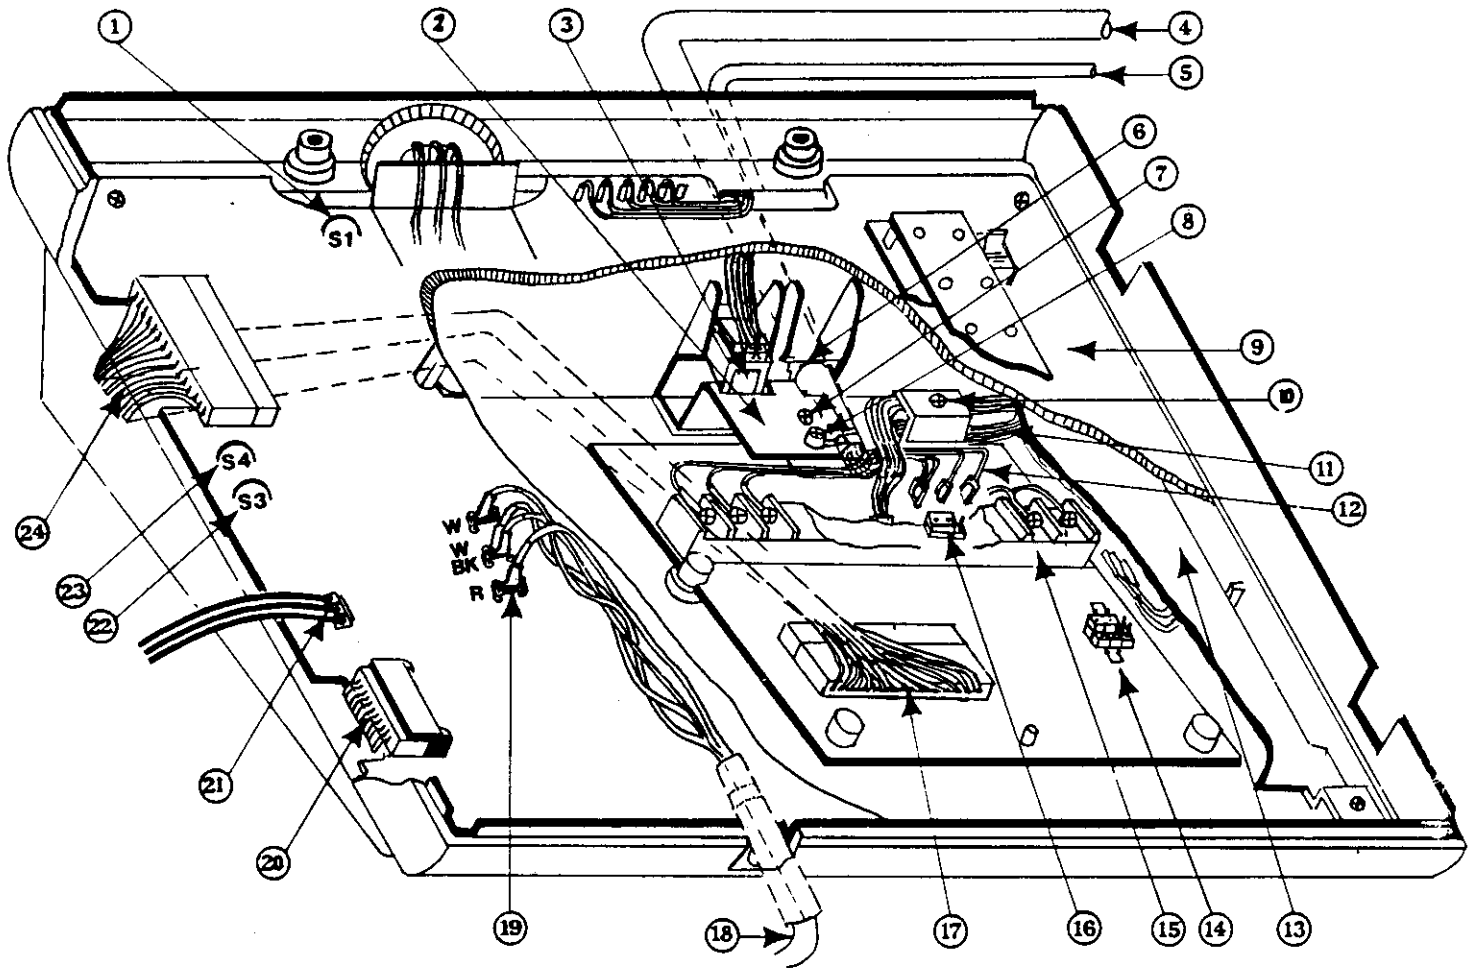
CUT AWAY VIEW OF EKT WITH EHIU PCB INSTALLED
